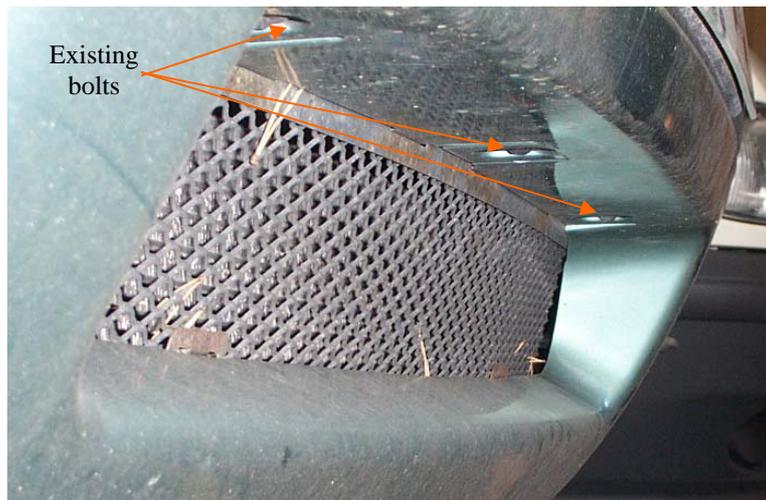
Top flange of the bolt-on spoiler would be fixed where marked (the air intake would be maintained in the new spoiler)
